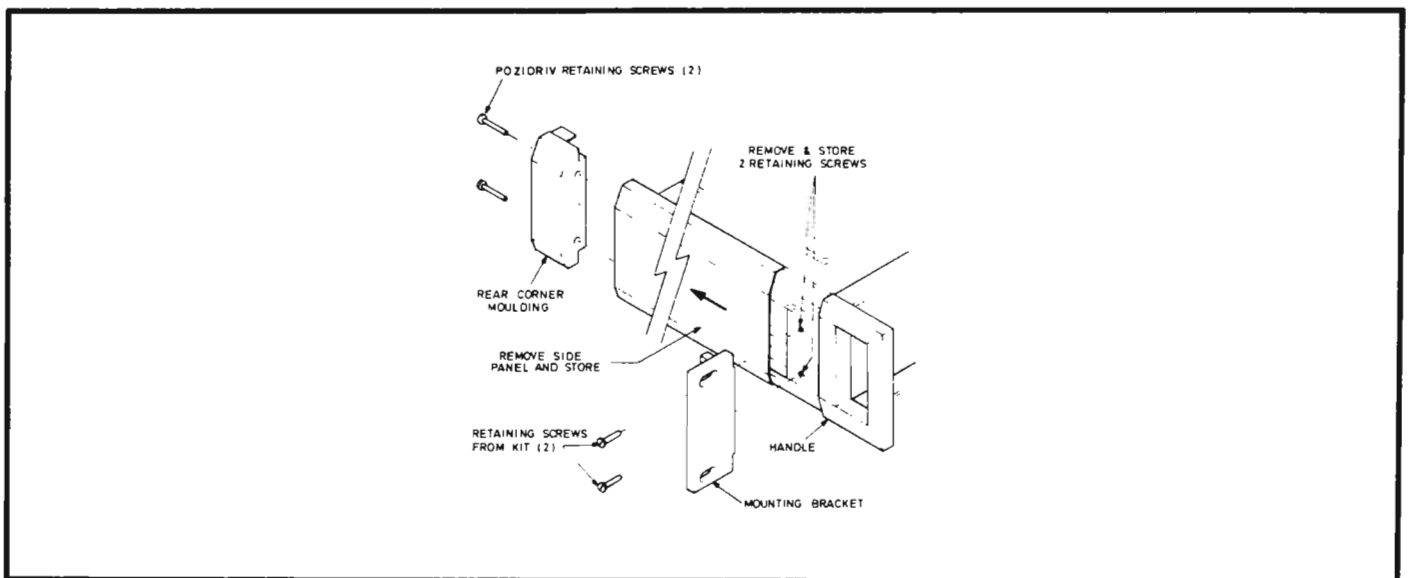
Fitting the Fixed Rack Mounting Kit
